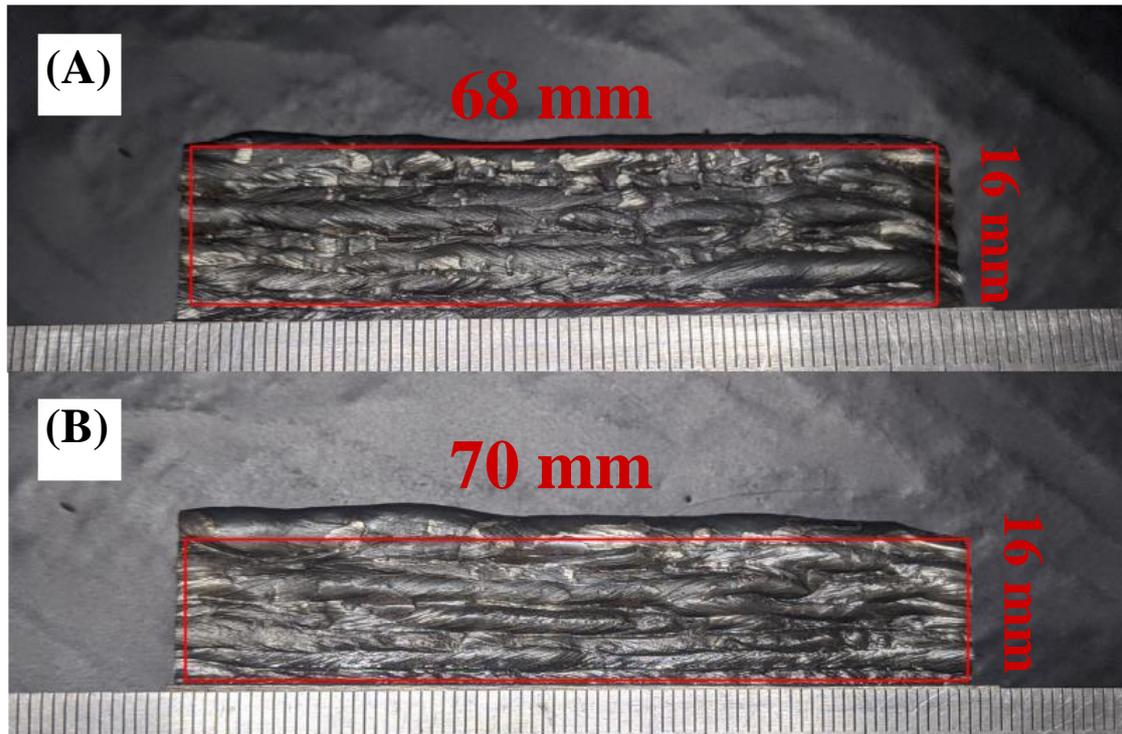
(A) Dimensions of preform 1; (B) Dimensions of preform 2.
